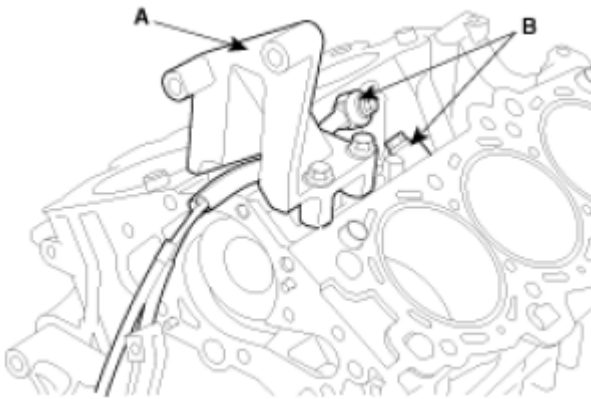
Identifying Power Steering Pump Bracket And Knock Sensor
